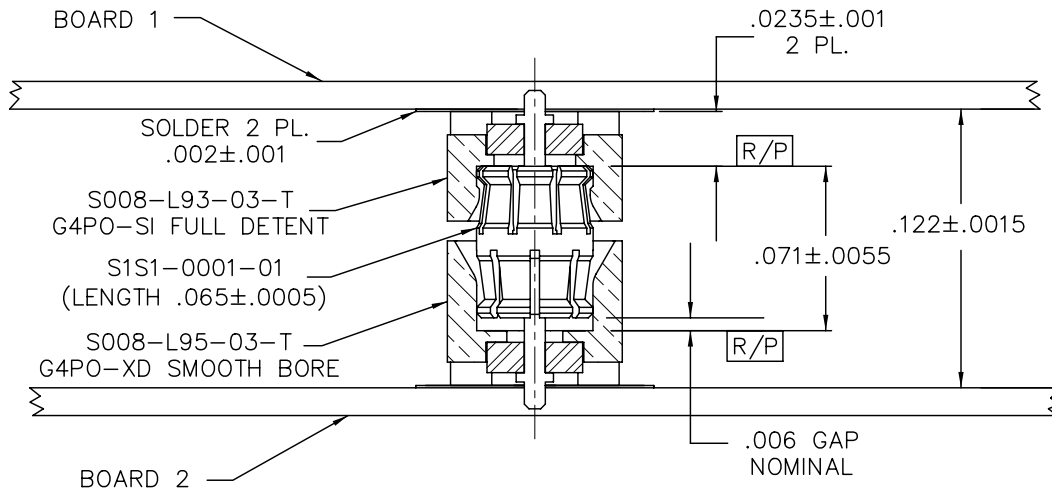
G4PO Board-to-Board Tolerance Analysis
